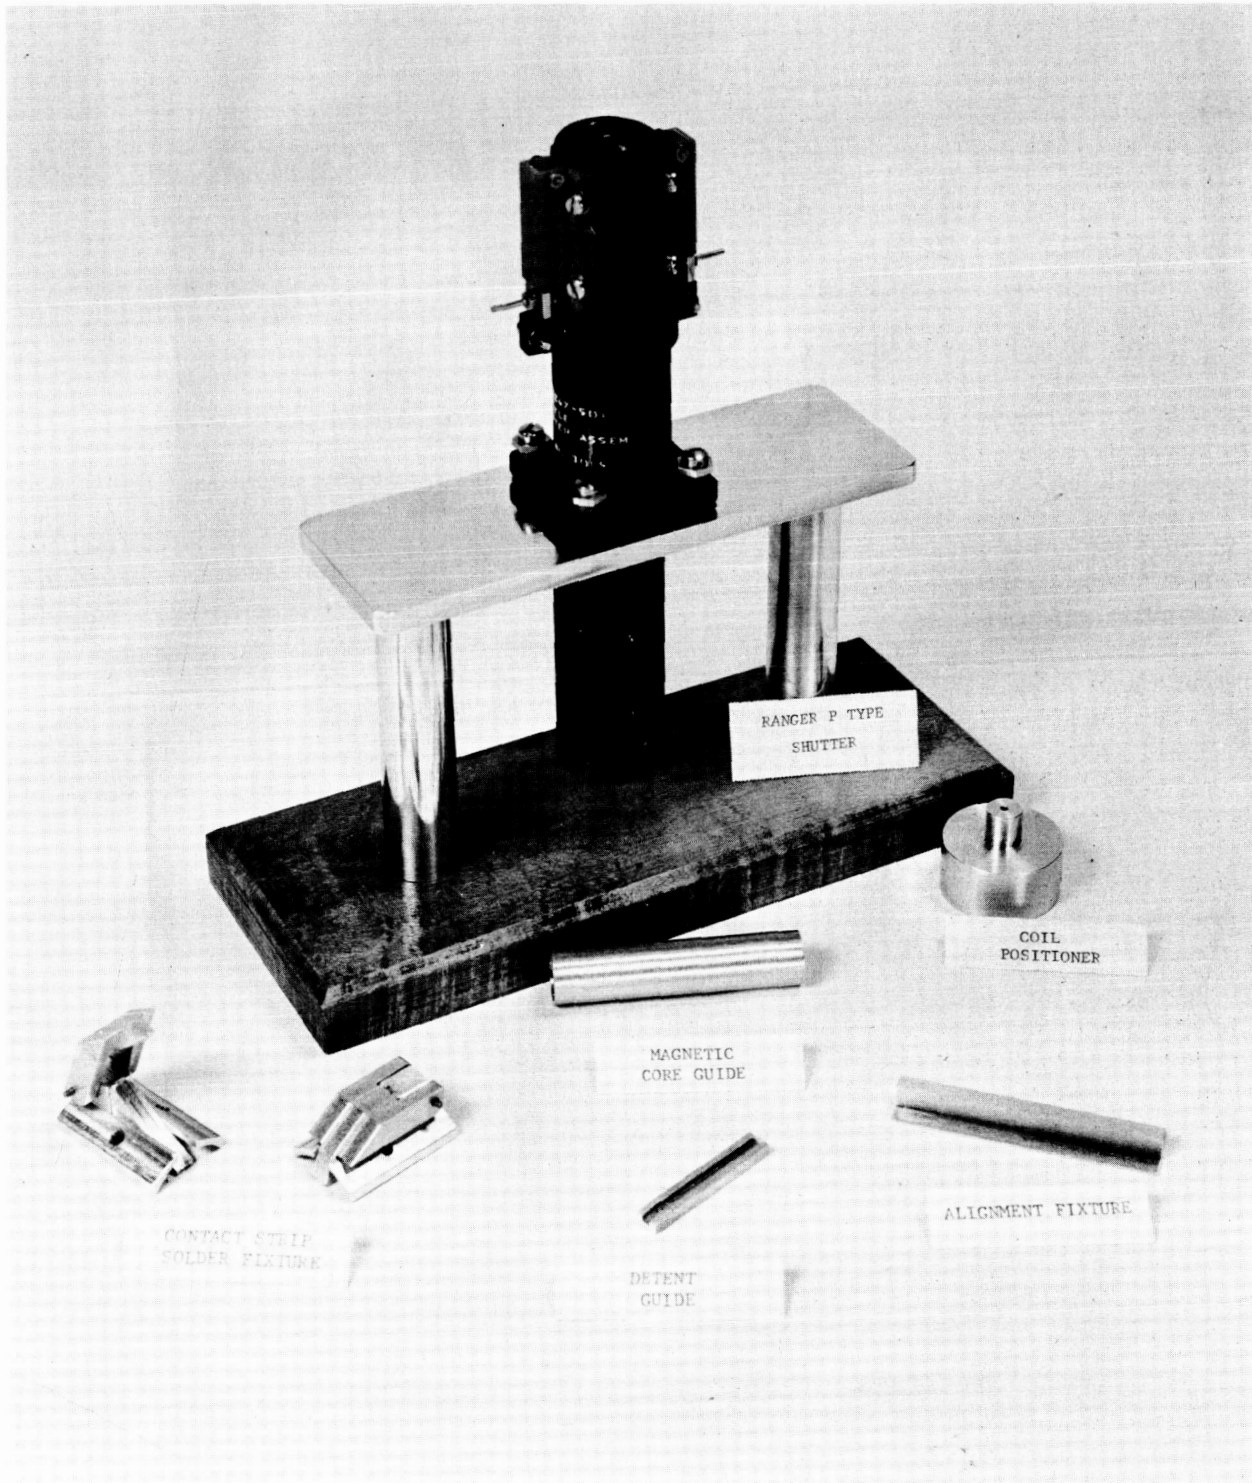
Set of Special Fixtures Developed to Facilitate Manufacture of Camera-Shutter Assemblies
